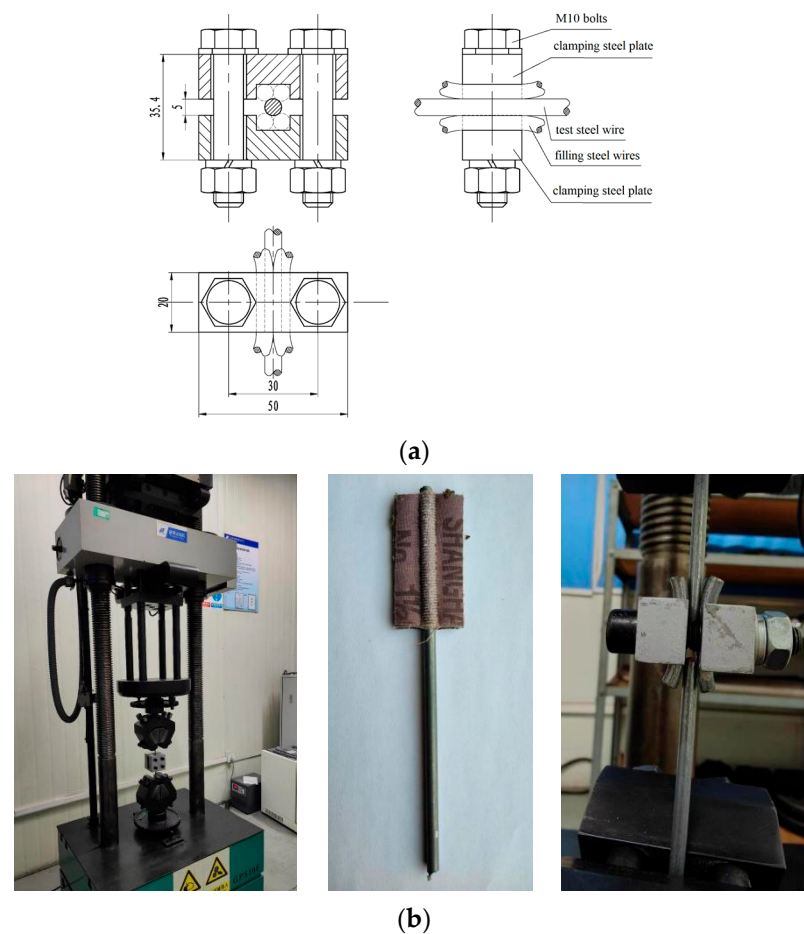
Single wire fatigue test. (a) Clamping device. (b) Test wire loading condition and failure mode.
